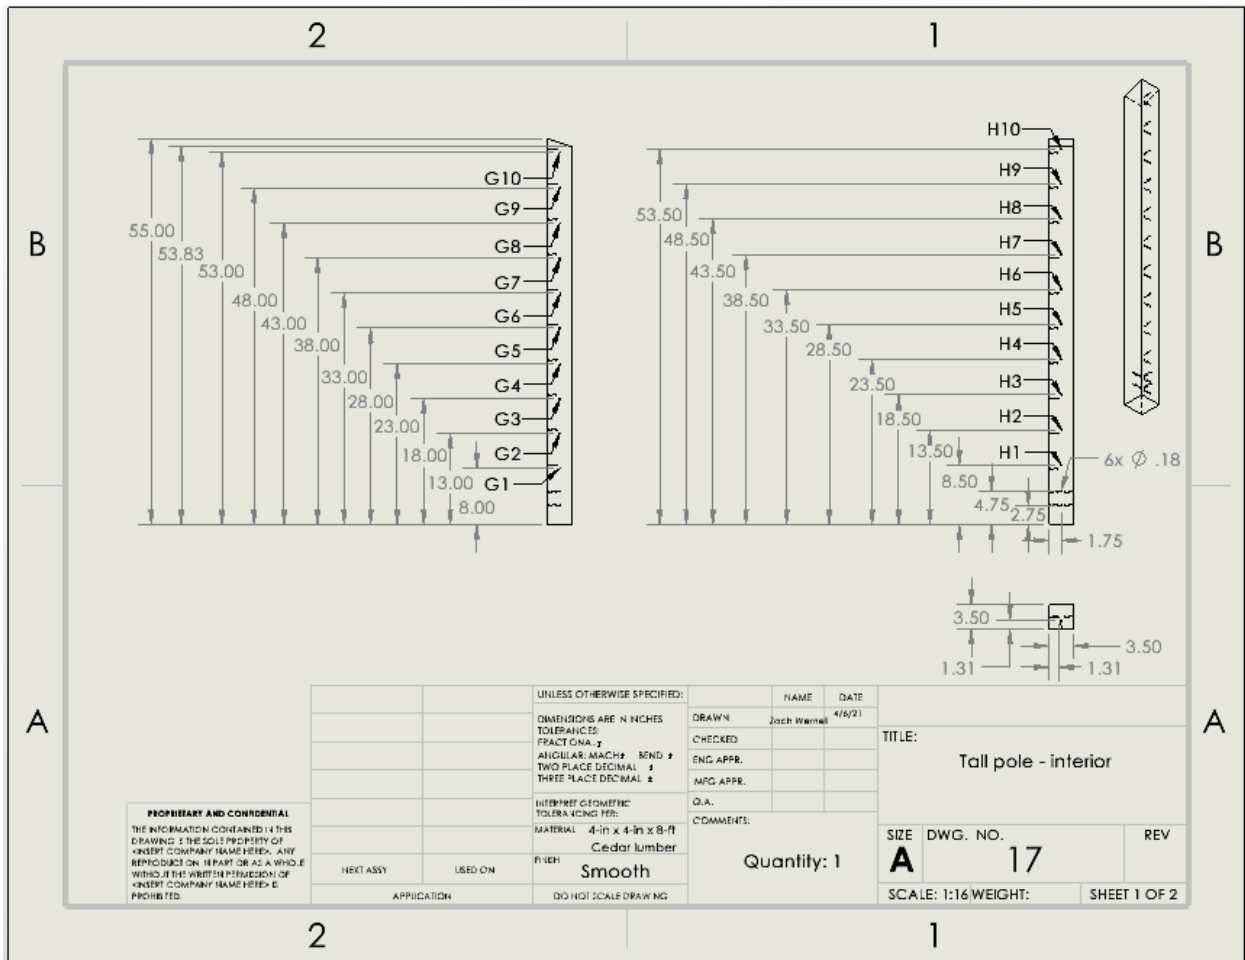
Engineering Drawing of the Tall Pole - Interior.
